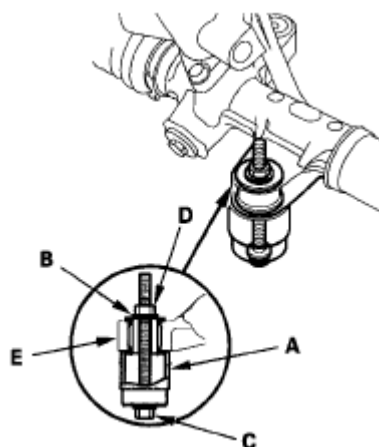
Identifying Gearbox Flange Bolt And Nut
